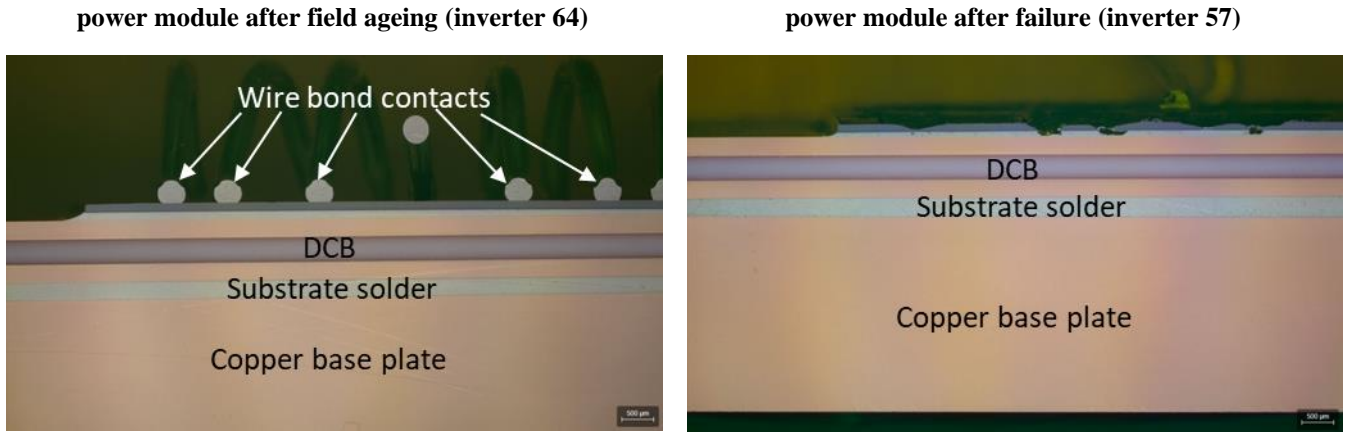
Cross sectional view of the bonding wires and solder contact using light microscope imaging of the IGBTs
